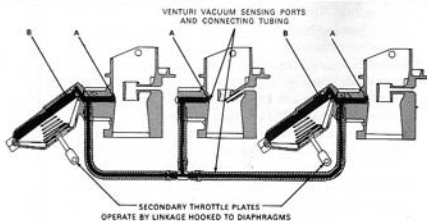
VACUUM CONNECTIONS TO SECONDARY CARBURETORS
